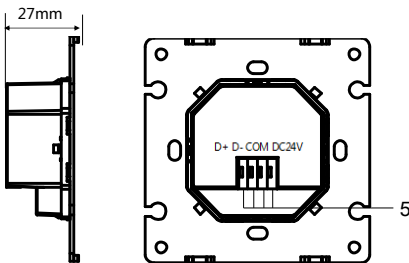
Dimensions - Side View Figure 4. Components - Back View
